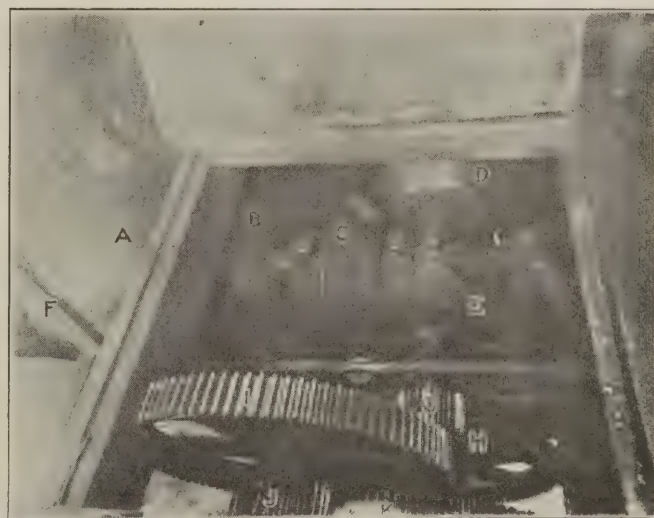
Flooring of Cab Raised to Show Driving Mechanism
